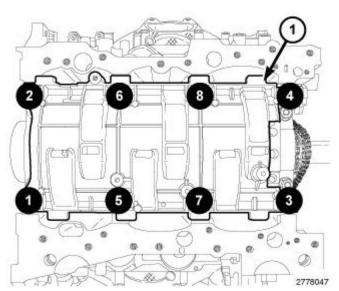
Main Bearing Cap Bolts From Windage Tray Removal Sequence Courtesy of CHRYSLER GROUP, LLC
